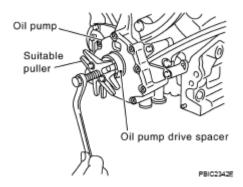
Using Special Tools To Remove Oil Pump Drive Spacer Courtesy of NISSAN MOTOR CO., U.S.A.
